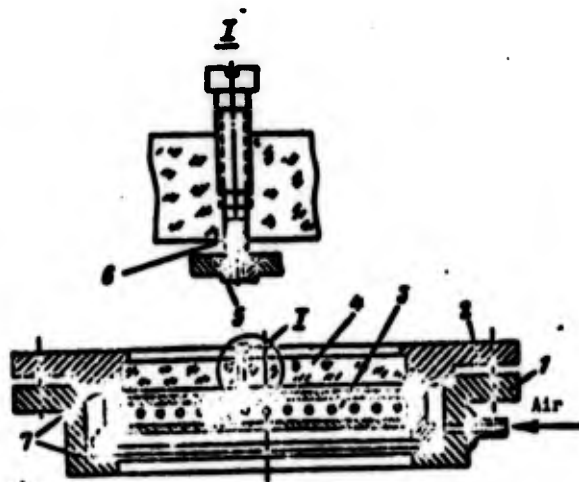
Device for pneumatic tests of a unit of injectors: 1 - casing; 2 - cover; 3 - unit of injectors; 4 - plastic; 5 - injector; 6 - rubber plug; 7 - rubber packings.
